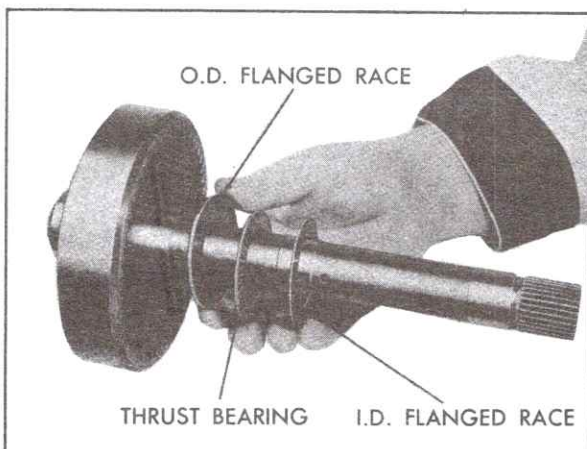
Installing Races and Thrust Bearing on Inner Face of Rear Internal Gear
